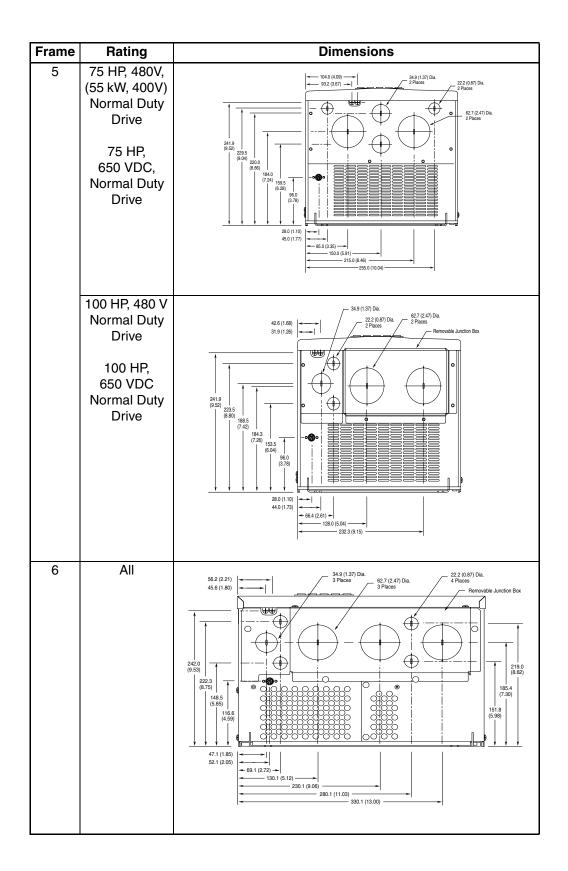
GV6000 Drive Dimensions Frame 6
